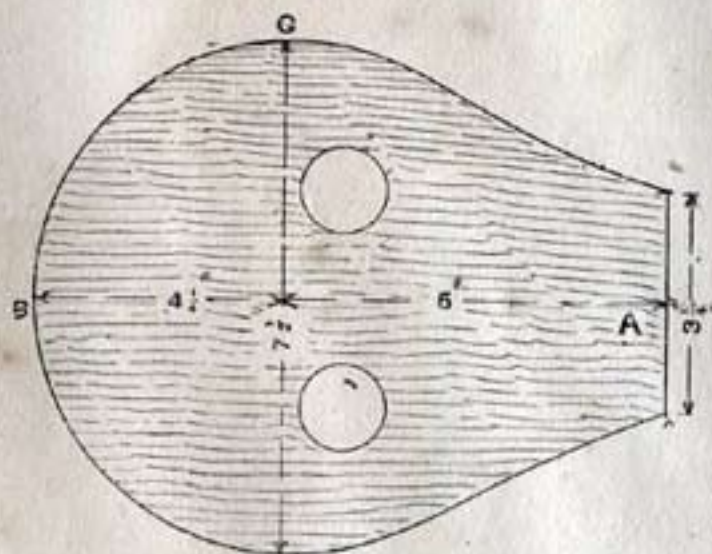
Inside Mould for Flat-backed Mandoline.
